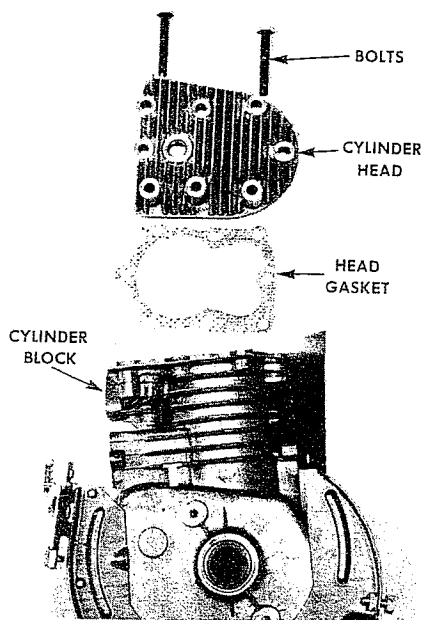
Bolts hold the cylinder head to the cylinder block.
